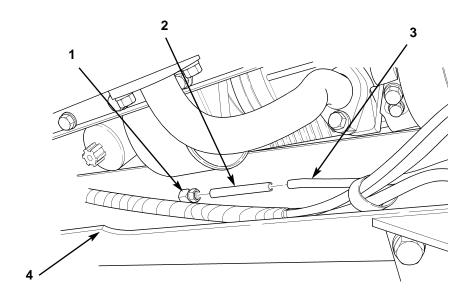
Cutting Existing Front Brake Tube for Reuse.
